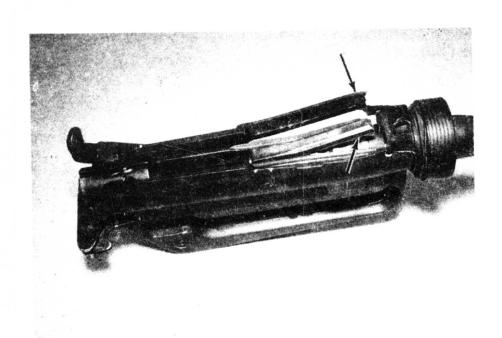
View showing fractured upper receiver housing and bolt carrier.
